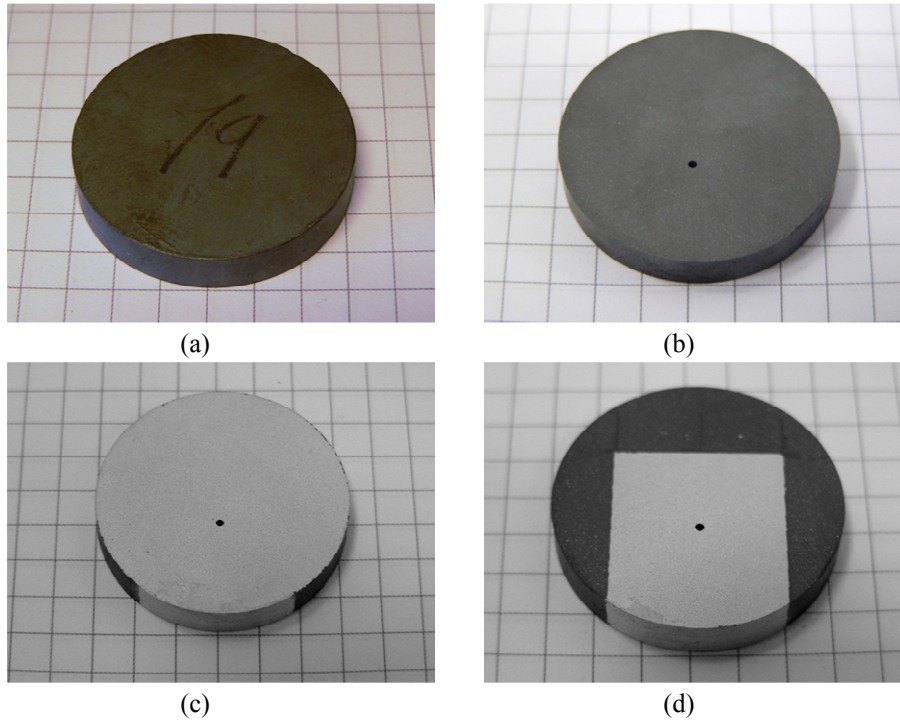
BSFO sample: (a) after sintering; (b) after grinding and punching; (c)–(d) after deposition of silver metallization on both sides (via-hole is clearly visible).
